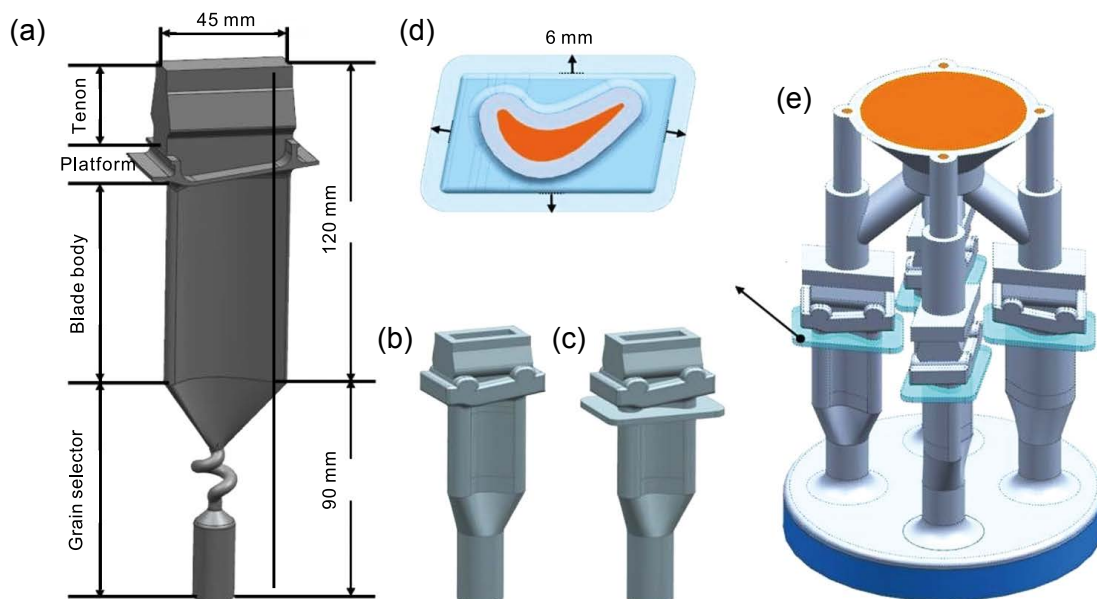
Blade structure (a), traditional mould (b), improved mould (c), mould baffle (d), and assembly moulds (e)
